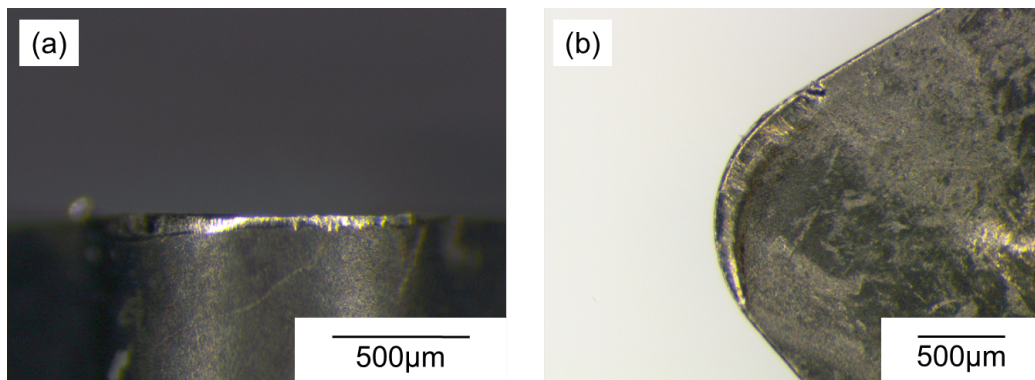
Microscope images showing the degree of tool wear after trial 3.2.3 on billet 3.1. Showing (a) the flank face and (b) the rake face.
